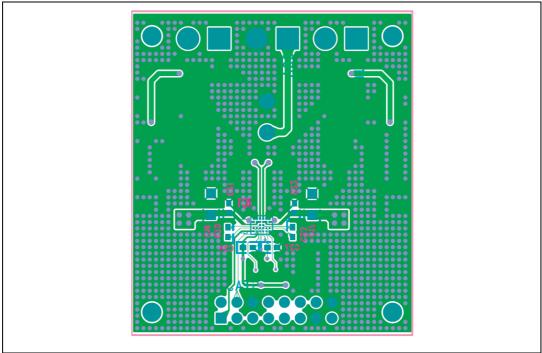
STA333IS demonstration board - two-layer PCB (bottom view)
